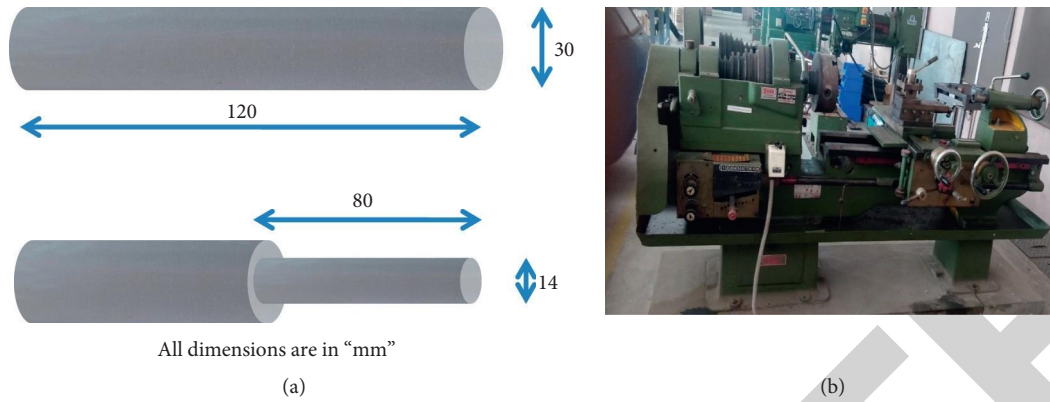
(a) Machining dimensions of the specimens. (b) Lathe machine used for this investigation.
